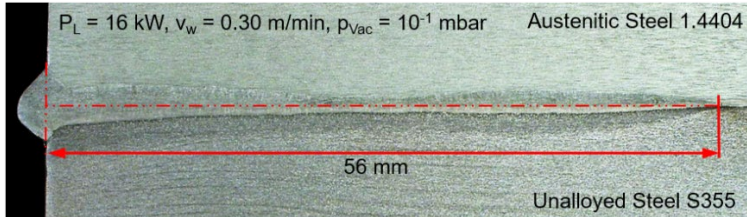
Example for non-existing deviation by thermos-electric effect with laser welding under vacuum
